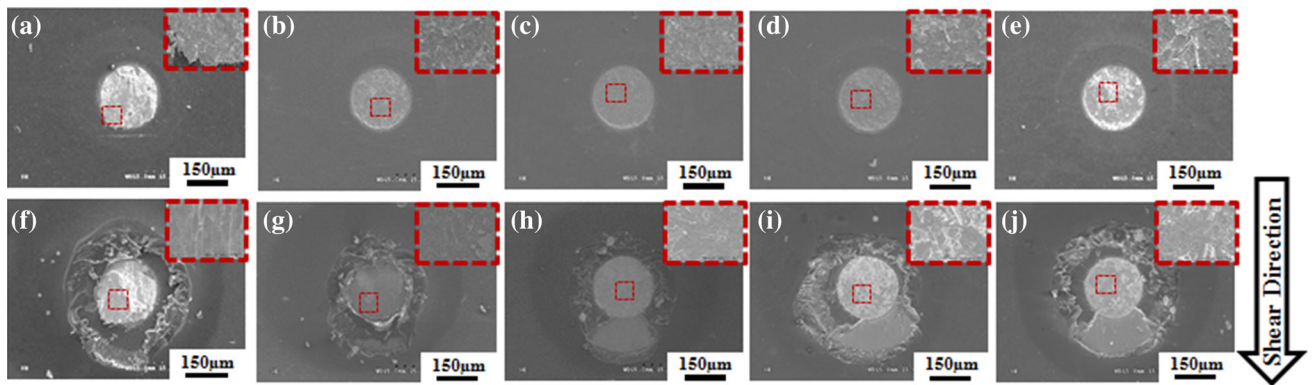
Fracture surfaces of Sn-58Bi solder (a–e) and Sn-58Bi epoxy solder (f–j) after shear test: (a, f) as reflowed, and after aging at (b, g) 115°C for 100 h, (c, h) 115°C for 300 h, (d, i) 115°C for 500 h, and (e, j) 115°C for 1000 h.
